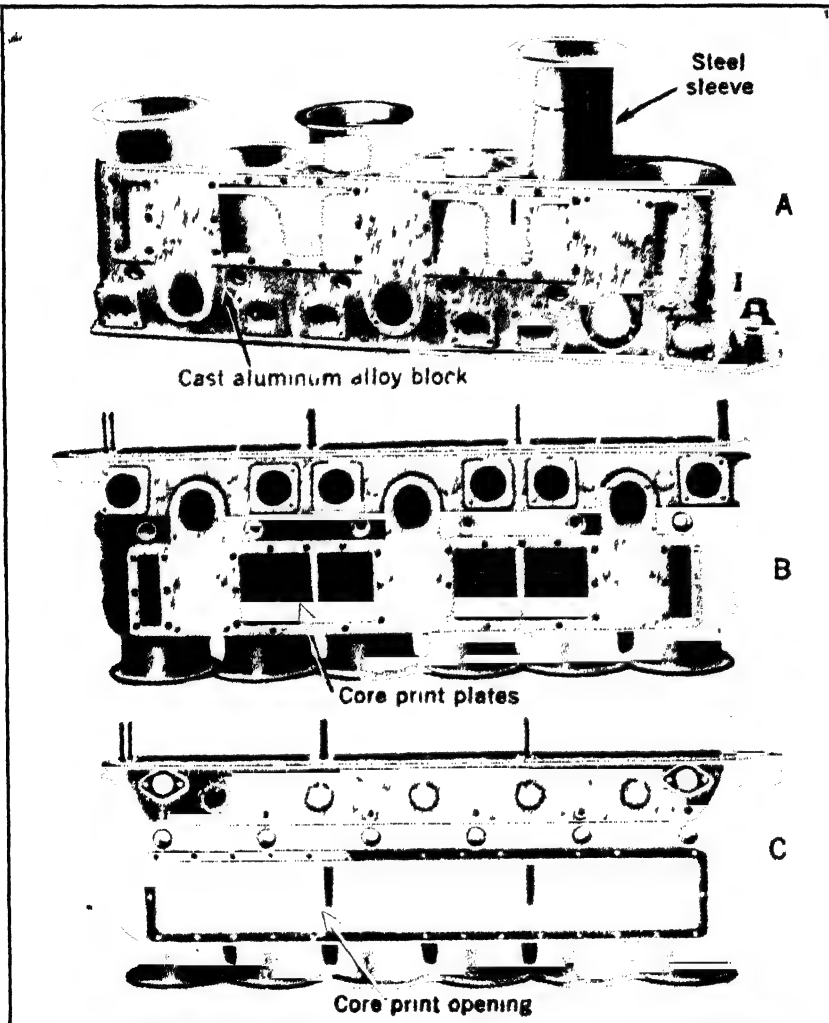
Illustration Showing Method of Casting Six-Cylinders and Integral Water Jacket in Aluminum Alloy Used by Hispano-Suiza Engine Manufacturers. Note Inserted Steel Sleeve Forming Retention Members, Because the Base Flange is Part of the Liner. View at A Shows Two Sleeves Pressed in Place, and One Partly in Position. The Side Views at B and C Show the Large Openings Available for Core Print Support when Casting.
